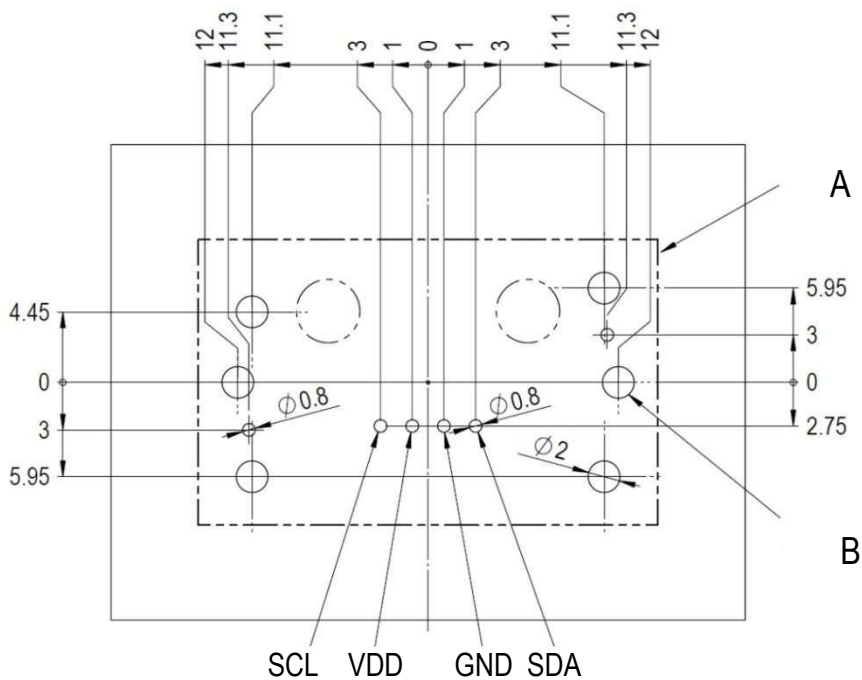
Footprint for PCB mounting (top view = sensor side). All dimensions in mm.
